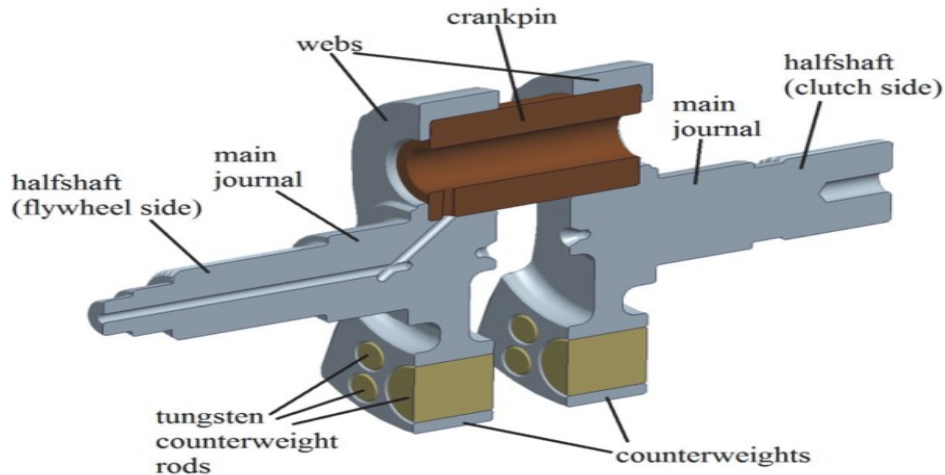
Typical Crankshaft with main journals that support the crankshaft in the engine block [2]
